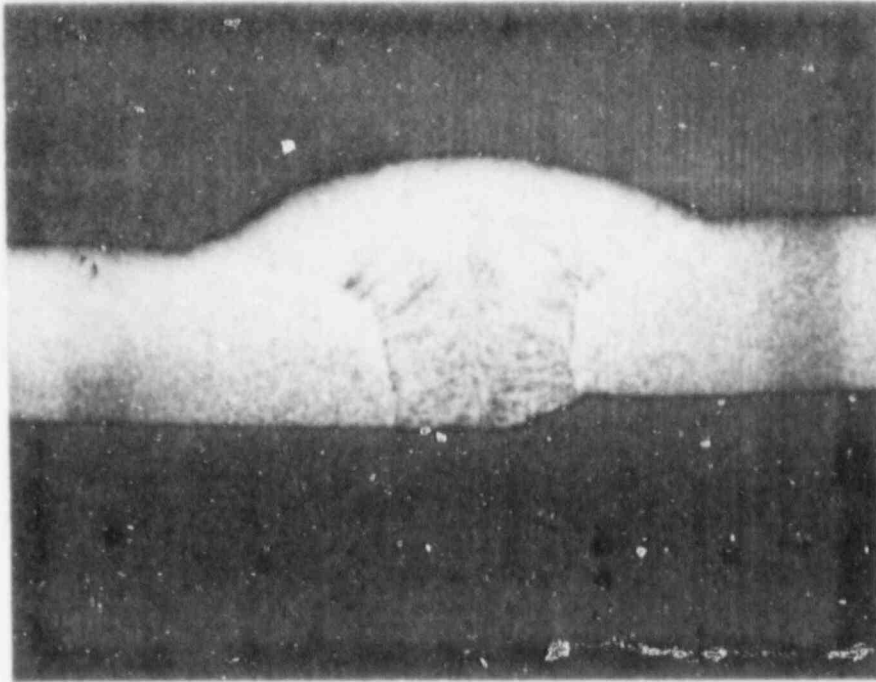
Cross-section of weld between dome sections (flat position 10x)
